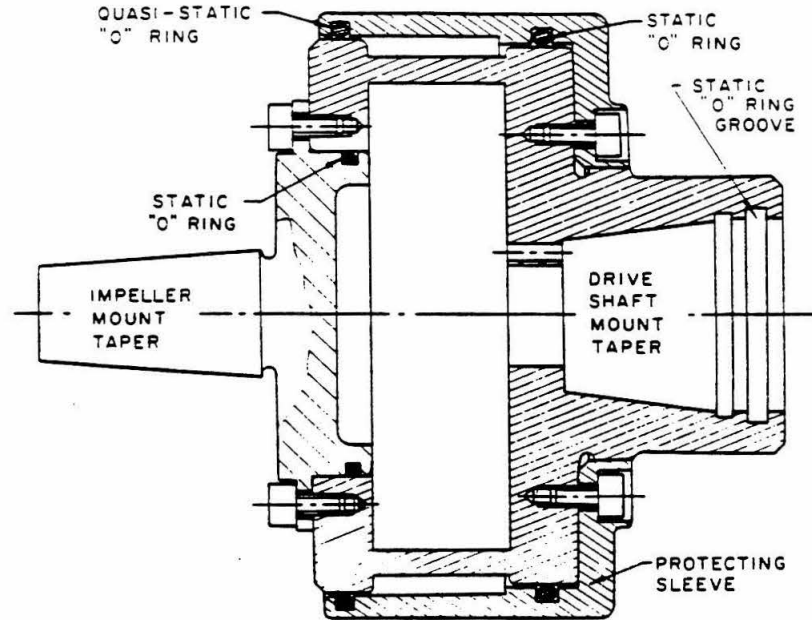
Assembly drawing of dynamometer with impeller mounting spindle, protective sleeve and various o-rings.
